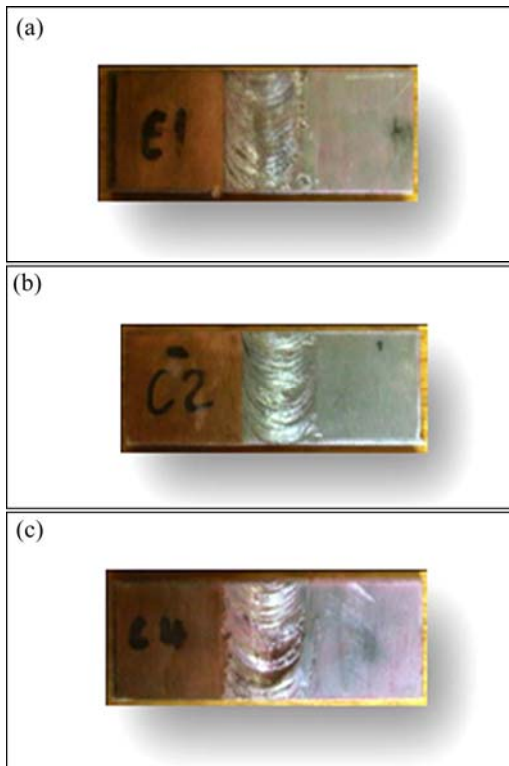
Surface appearances of friction stir welded samples: (a) Sample C1 (950 r/min, 50 mm/min); (b) Sample C2 (950 r/min, 150 mm/min); (c) Sample C4 (950 r/min, 300 mm/min)
